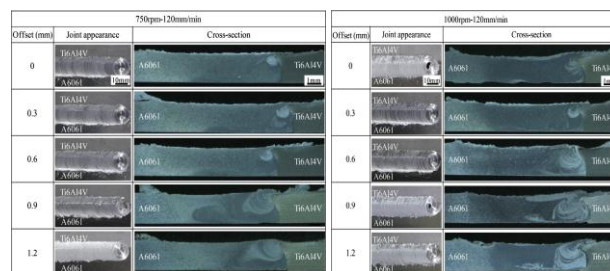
Surface appearance and cross-section macrostructure of joints with various probe offset distances [3].
